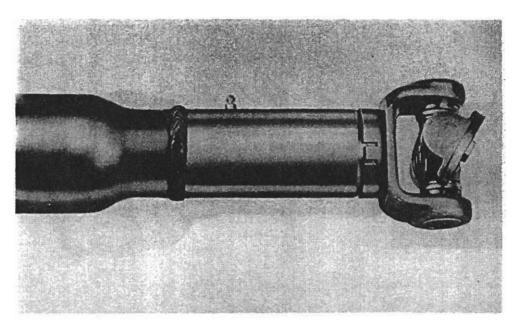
The "Mechanics" Universal Joints Incorporate a Journal Cross, Two Round and Two Wing Type Bearing Retainers.
